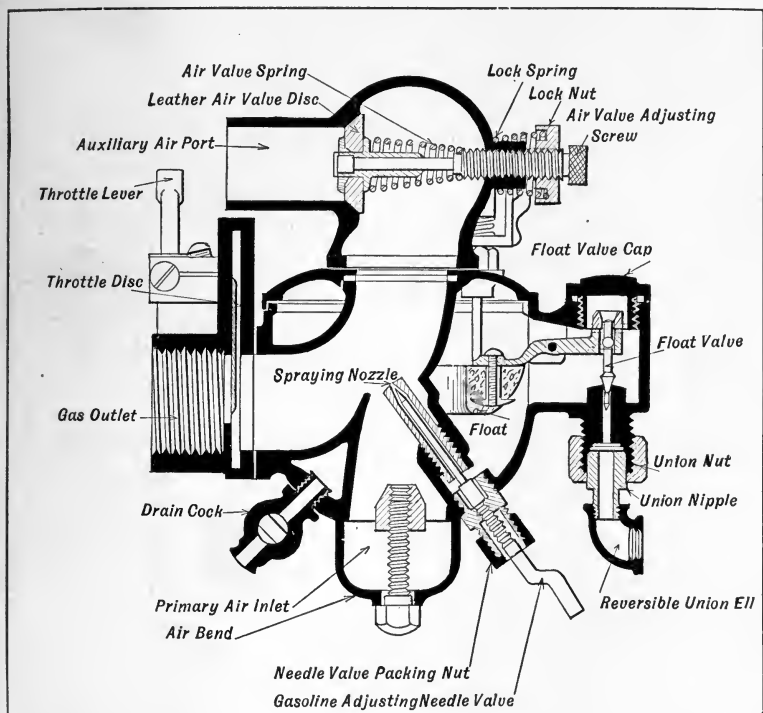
Schebler Carburetor Construction Outlined. This Is One of the Simplest Forms that Have Been Used Extensively.
